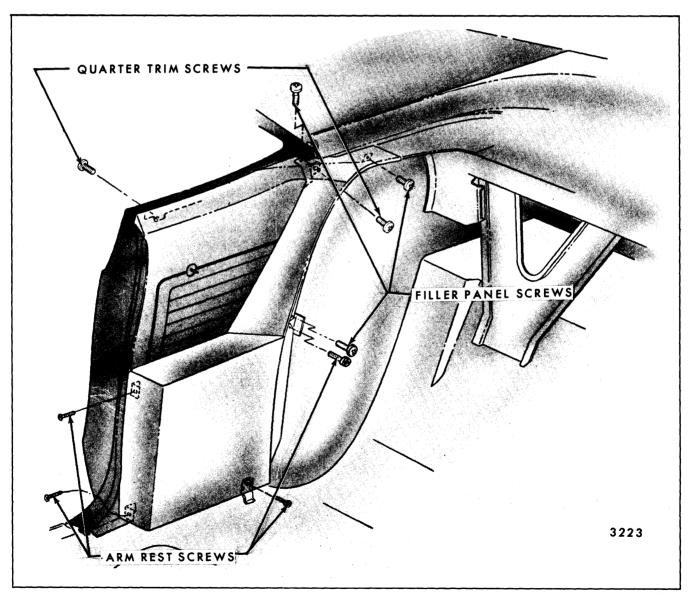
Rear Quarter Arm Rest and Trim Assembly - "39487" Style
